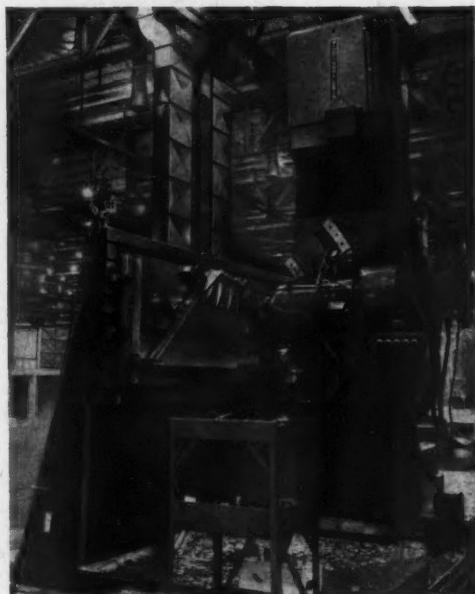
A close-up view of the Giddings & Lewis Variax machine with a component in position
